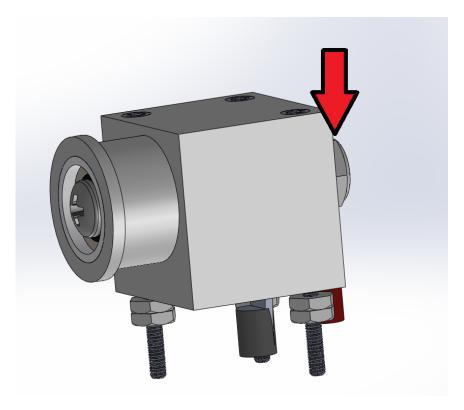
To tighten the screw back in place, you will need to hold the lock nut (shown with arrow) while you turn the screw itself. Tighten until the bottom of the screw head appears flush with the inner ceramic and cathode. From here, you should do a resistance check between the anode and cathode. Typical resistance values for the CANYVAL Thruster should be anywhere between 0.5 $k\Omega$ and a few $M\Omega$ s. An ideal case will be in the $k\Omega$ range.
